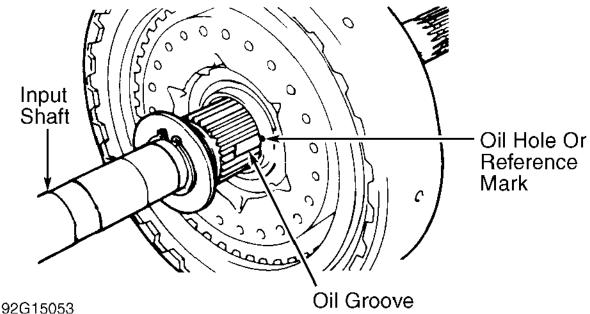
Aligning Input Shaft & Rear Clutch Retainer Courtesy of Mitsubishi Motor Sales of America.
